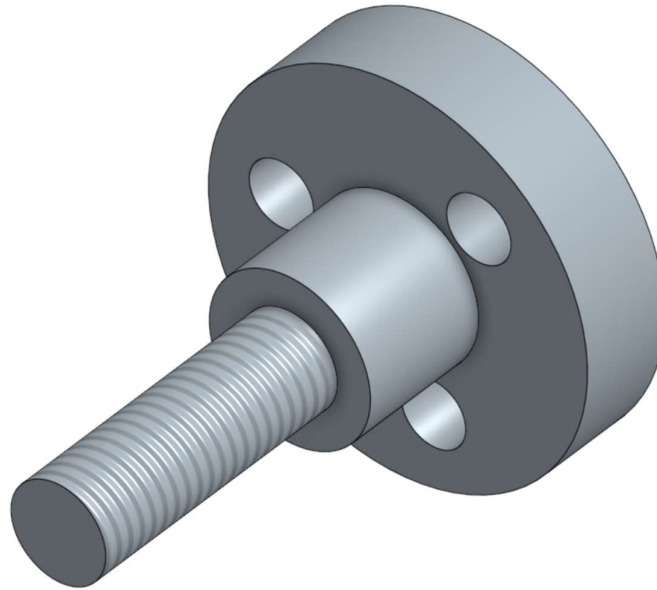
CAD model of the tamper-proof bolt for rotary valve access control
